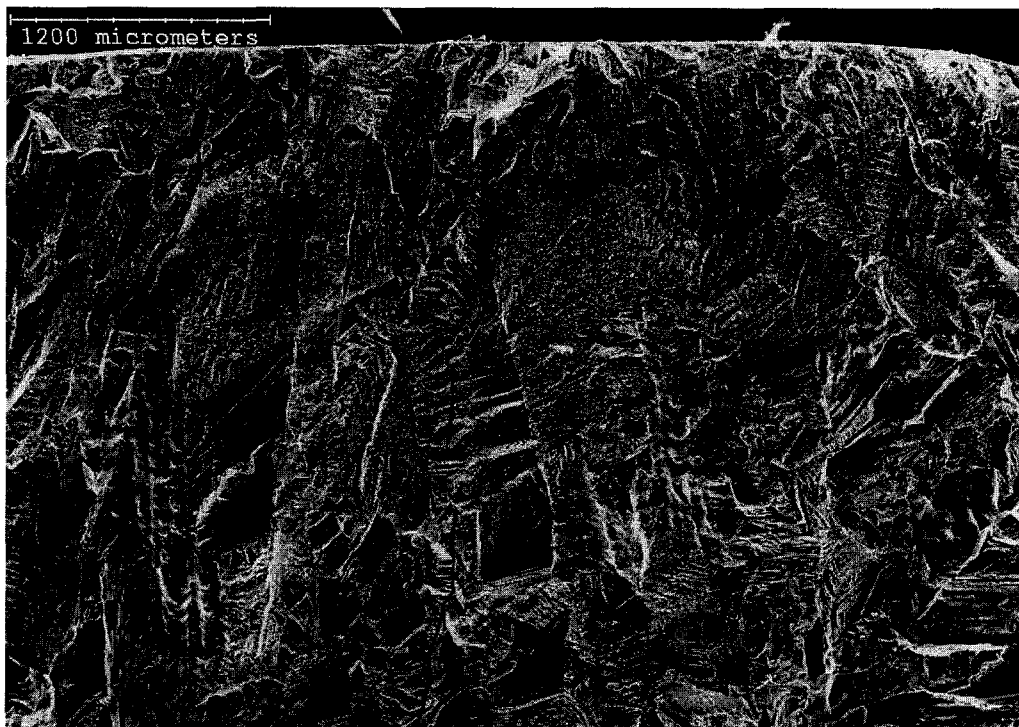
SEM Image of Alloy 8 Fracture Surface (4-hour cooled) (SE)
